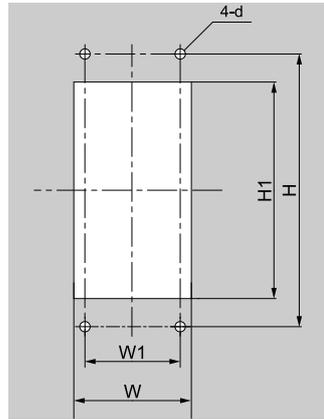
Panel Cut-Out Dimensions for Mounting to Interior of Control Panel
